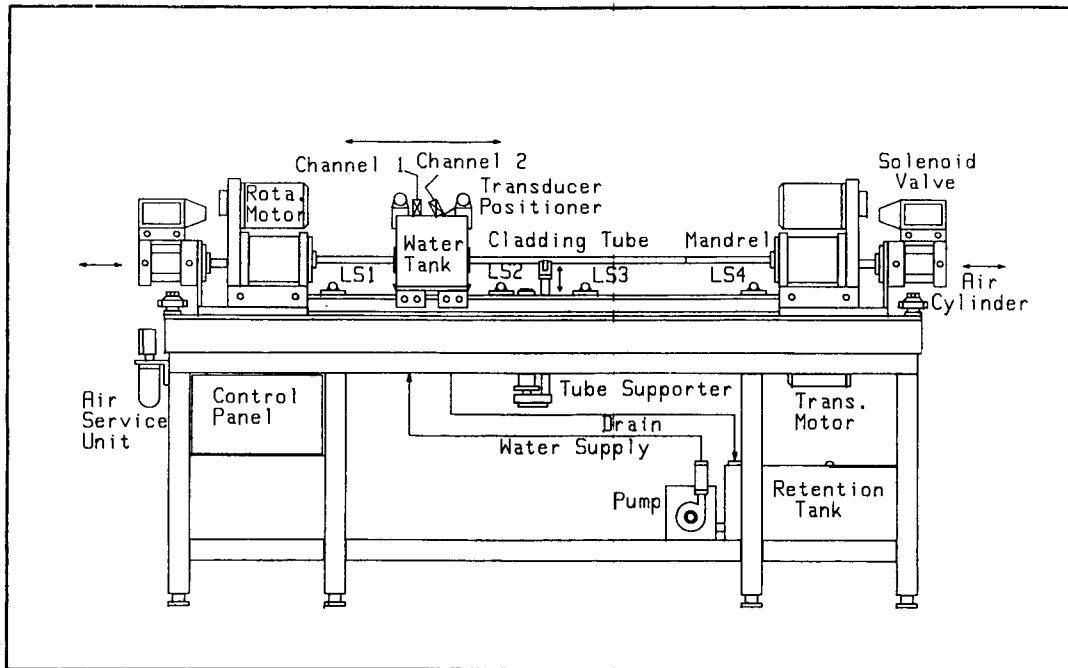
Cross Sectional View of the Ultrasonic Scanner Developed at KAERI Using a Test Tank Translation Technique.
